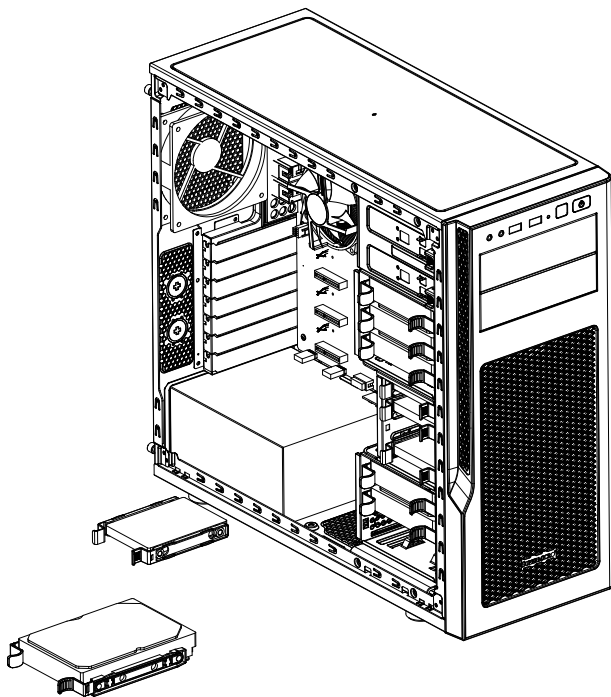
Installing Drives and Mounting Brackets in to the Cage
